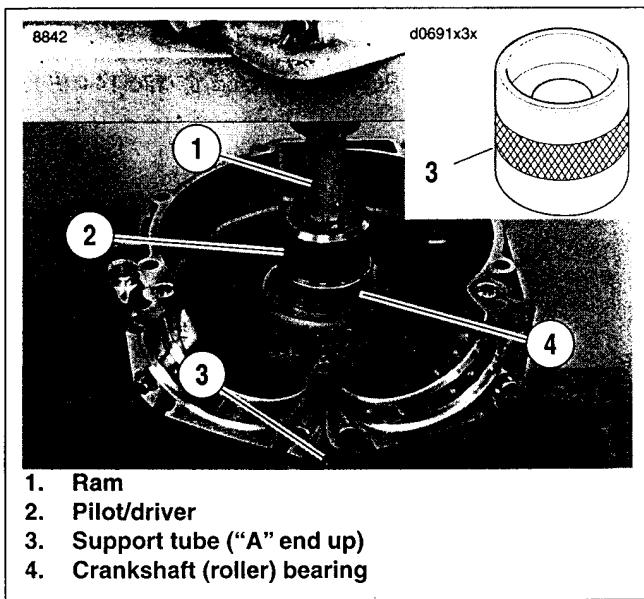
Left Crankshaft (Roller) Bearing Installation
